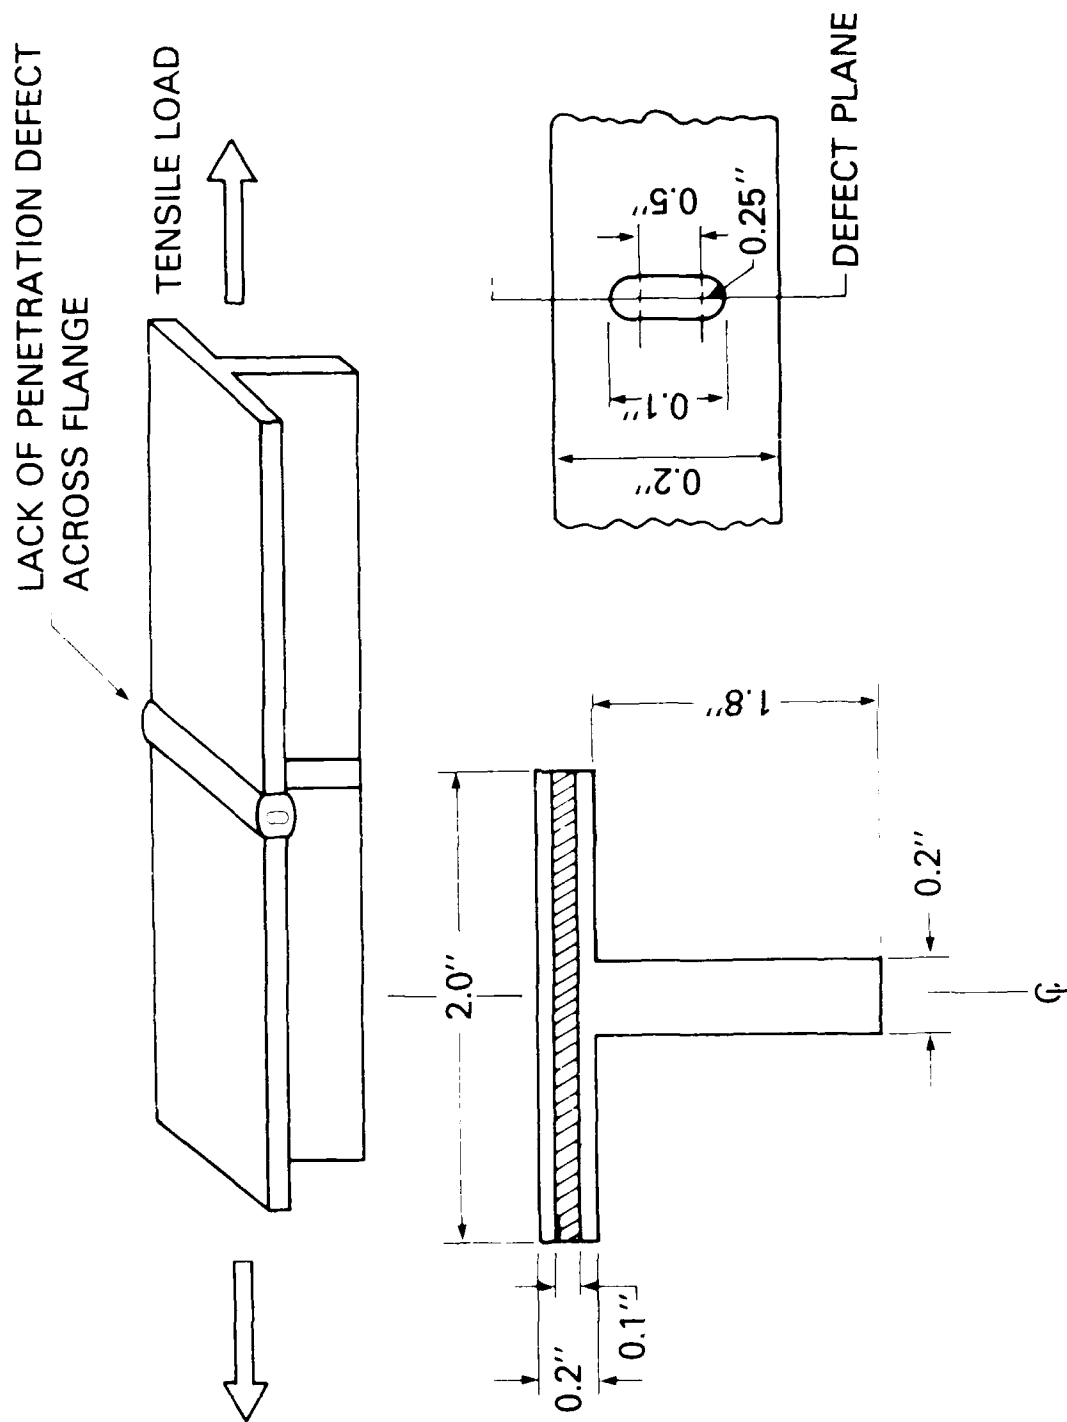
T-section containing a weld defect across the flange.
